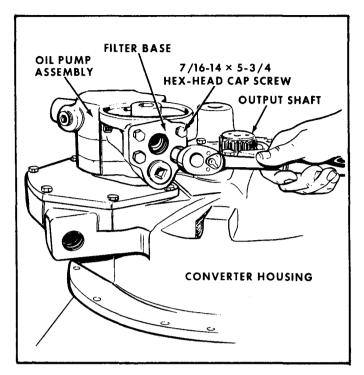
Removing the Filter Base from the Oil Pump Assembly.
